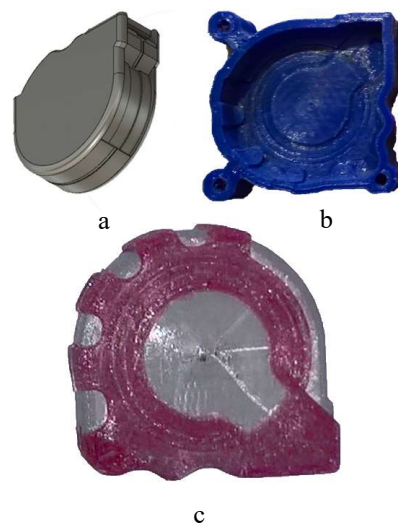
Tape measure prototype: *a* – tape measure body; *b* – 3D-printed mold, 1 of 2; *c* – finished tape measure prototype.
